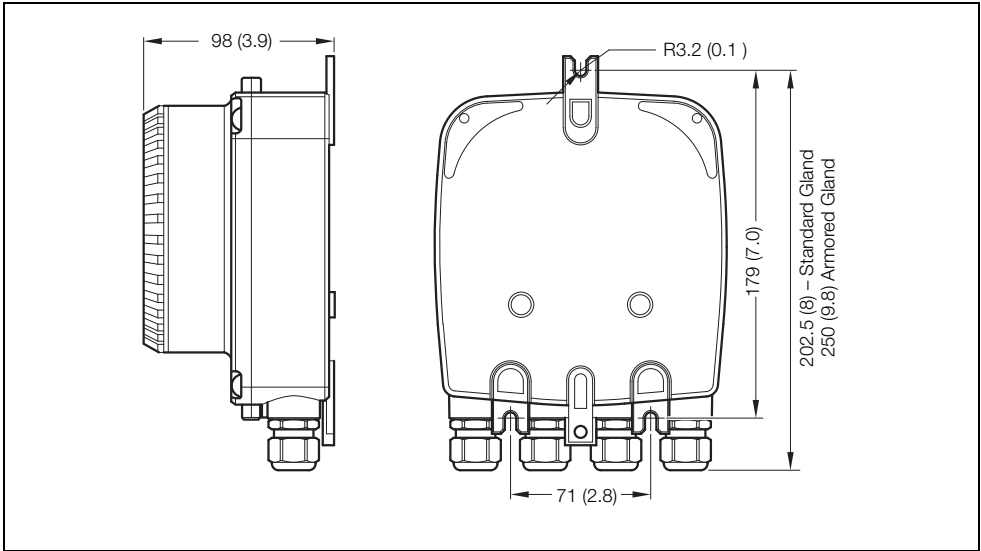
Remote Transmitter Dimensions (Standard Gland Shown)
